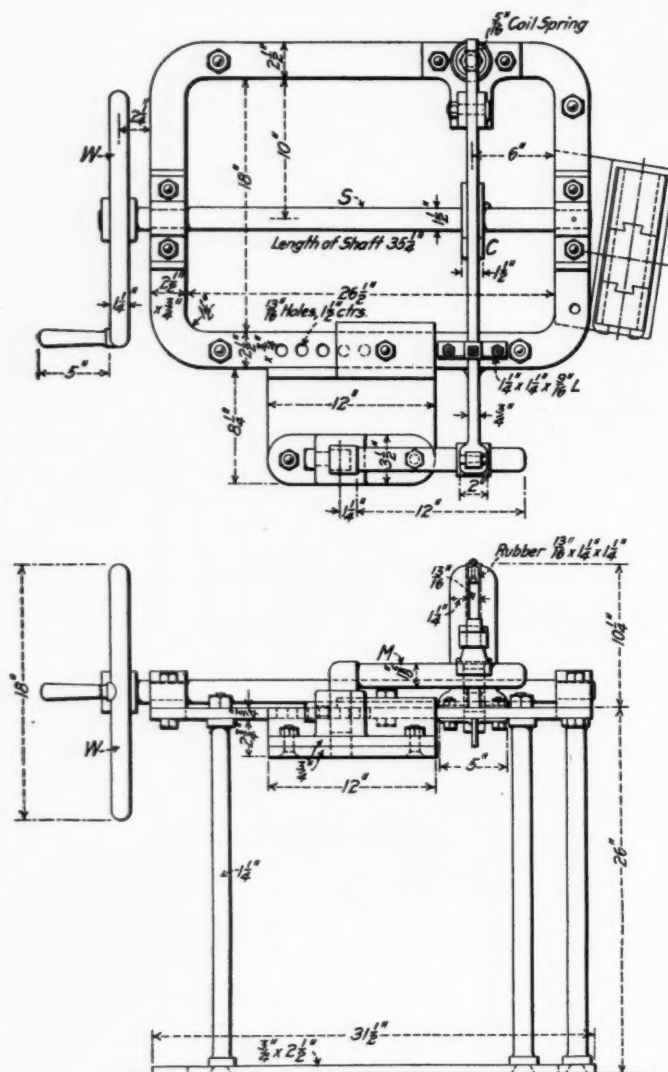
Tube Welding Machine Arranged for Hand Power.
